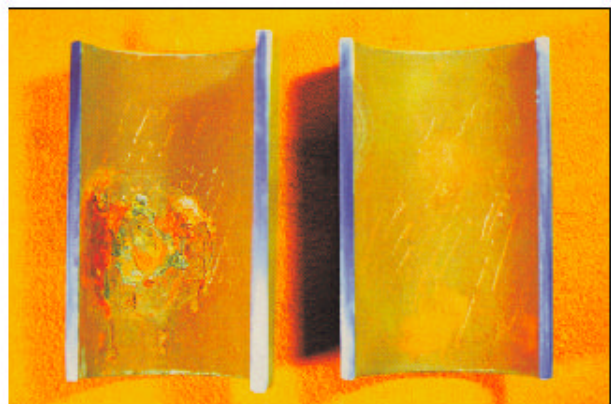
Corrosion of a water tube boiler by dissolved oxygen
